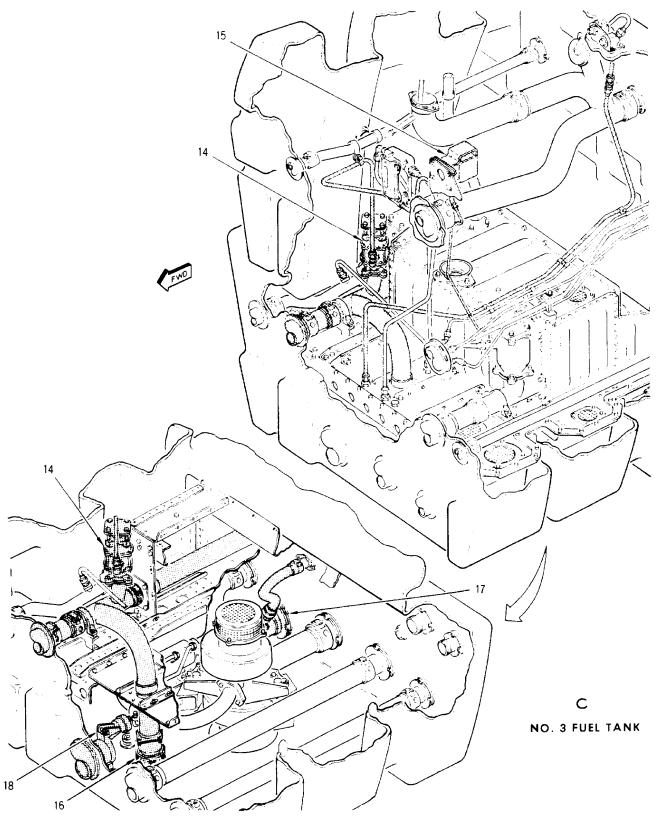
Refuel/Defuel System Component Locator (Sheet 5)
